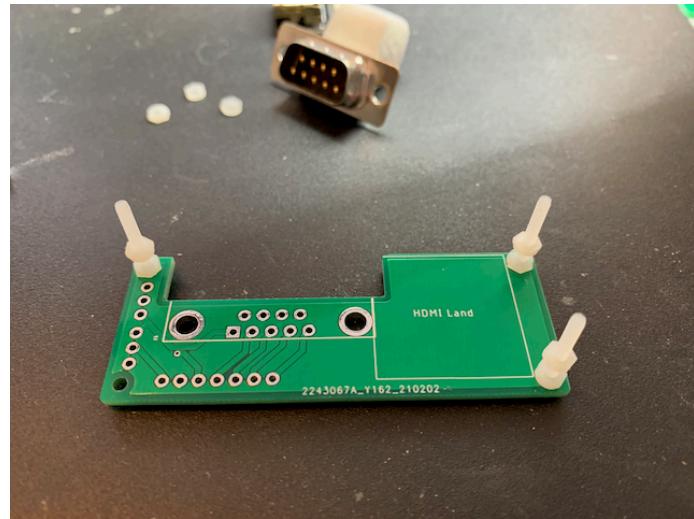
Fit second set of M2 nuts onto the Backplane PCB
